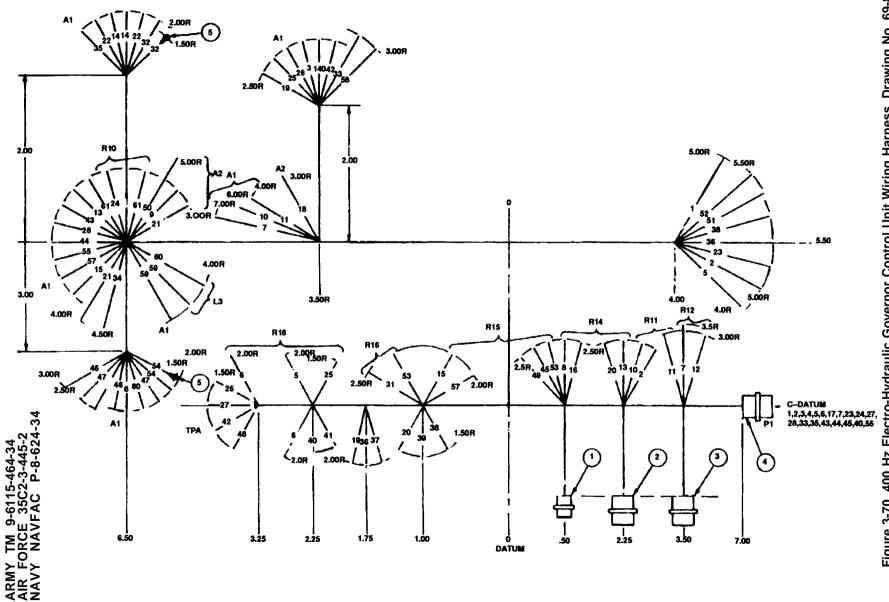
400 Hz Electro-Hydraulic Governor Control Unit Wiring Harness, Drawing No. 69-814 (Sheet 1 of 2)
